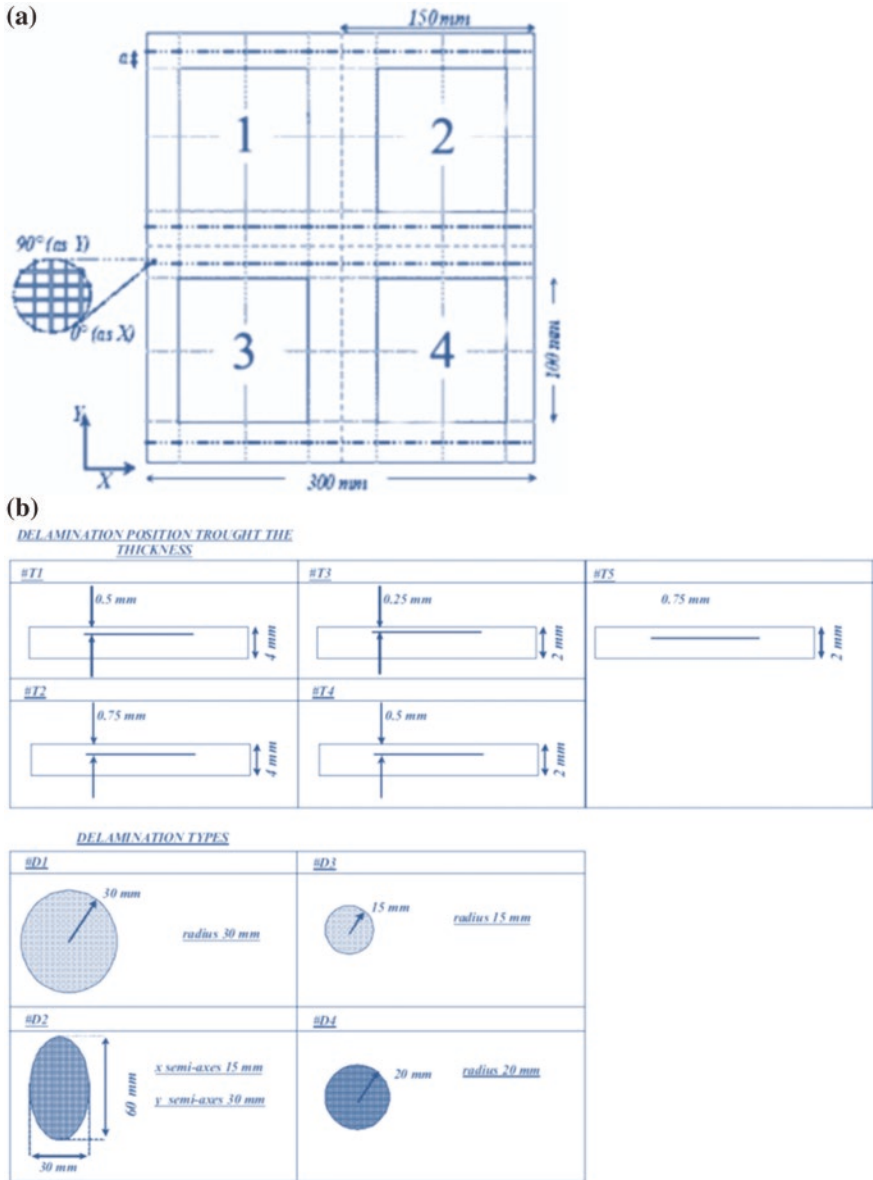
Schematic representation of specimens type II. a Frontal view. b Details of inserts shape, dimension and position (for more details see Table 12.1)
